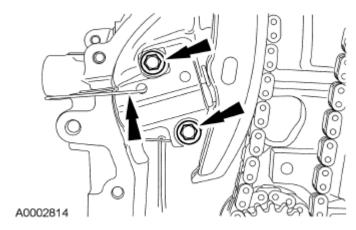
Installing Paper Clip Into Hole In Tensioner Housing Courtesy of FORD MOTOR CO.
